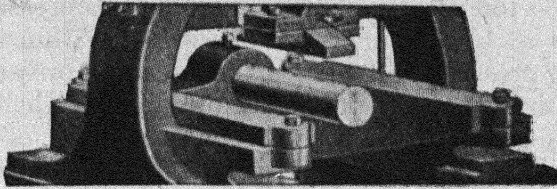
HORN FRAME FITTED WITH STRAIGHT HORN
